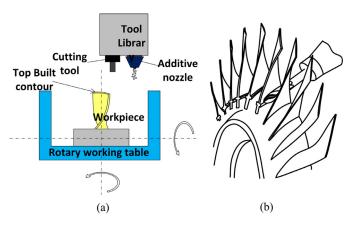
(a) The typical configuration of a hybrid machine; (b) A blisk of complex shape.
